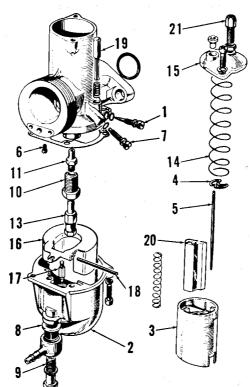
Exploded view of Amal carburetor with concentric float.
